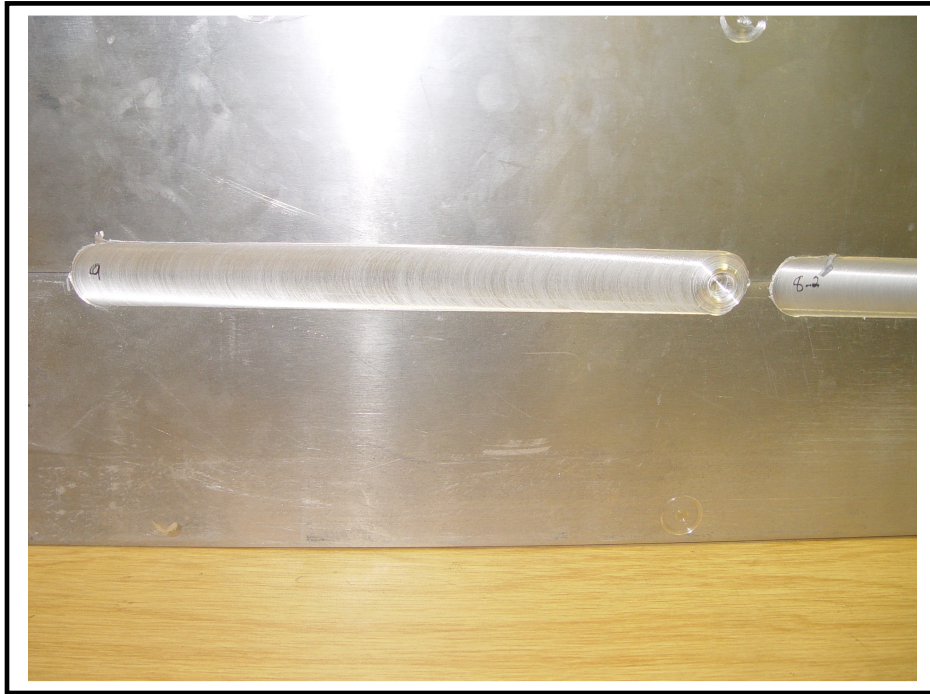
FSW-weld (5083 alloy and Tool 2).
